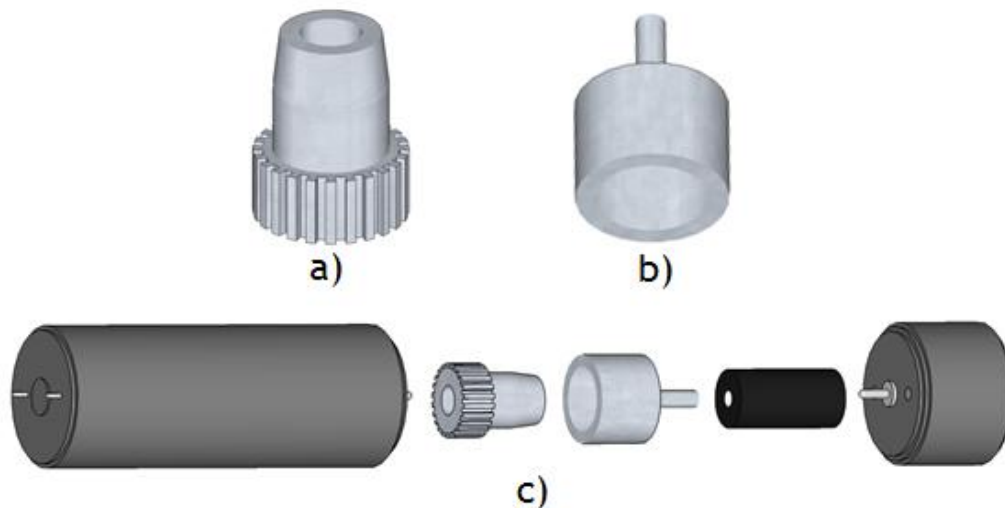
The new mechanical system coupled to the original gearbox and the encoder. a) representation of the gear that existed previously in the motor shaft. In b) designed mechanical part. c) exploded view showing the coupling system to the encoder and gearbox of the engine.
